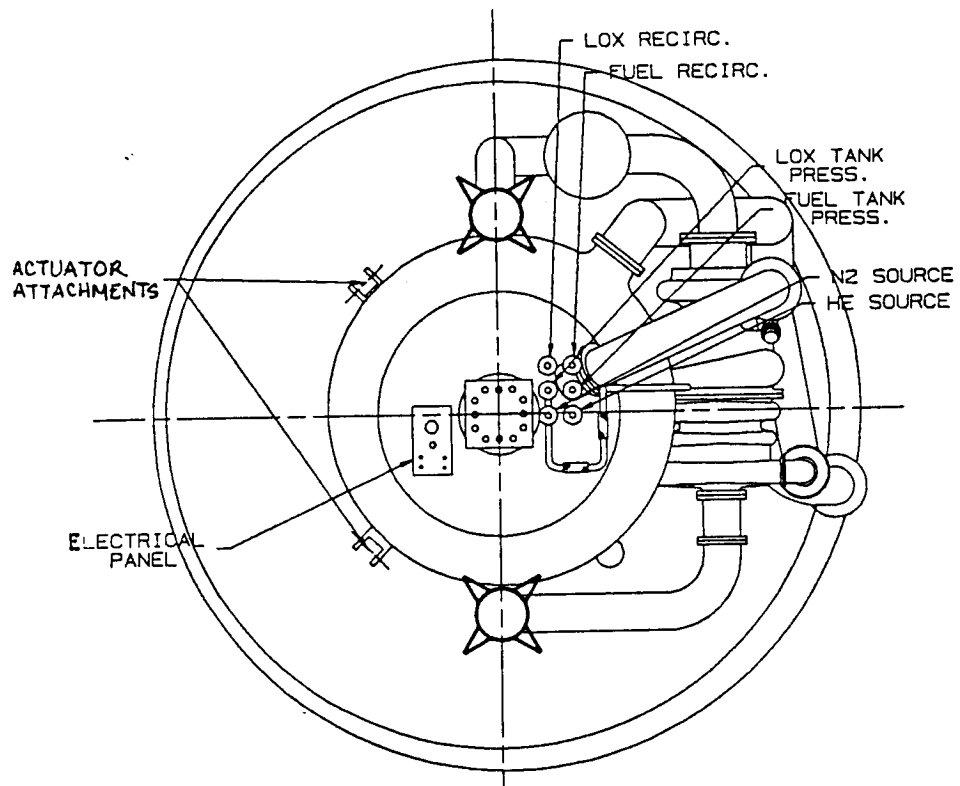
Preliminary Drawing of LO2/CH4 Split Expander Engine
